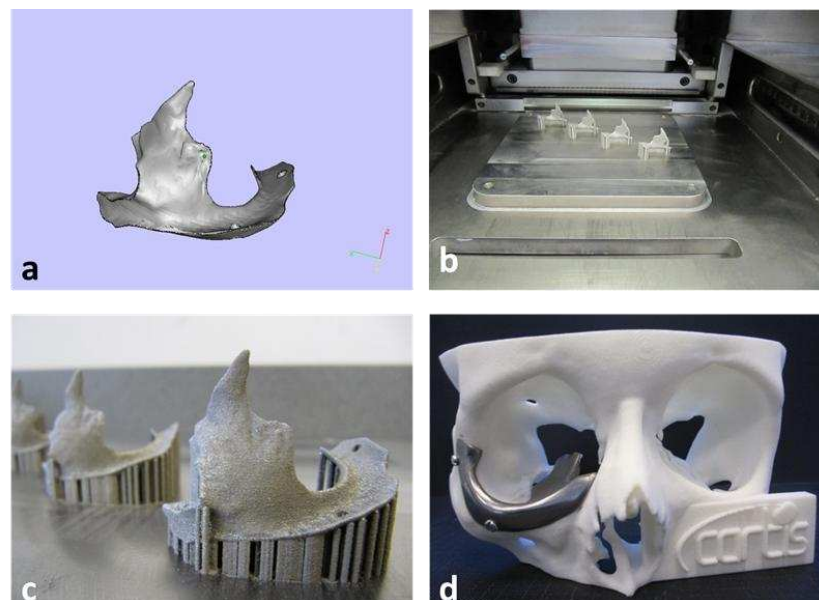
Customised maxillo facial implant fabricated using SLM. CAD design of a customised maxillo-facial implant (a); Implants fabricated in a SLM machine (b); Implant with its support structure (c); Custom fitting of implant to a model of the damaged part (d) [Implant design and 3D model courtesy of CARTIS].
